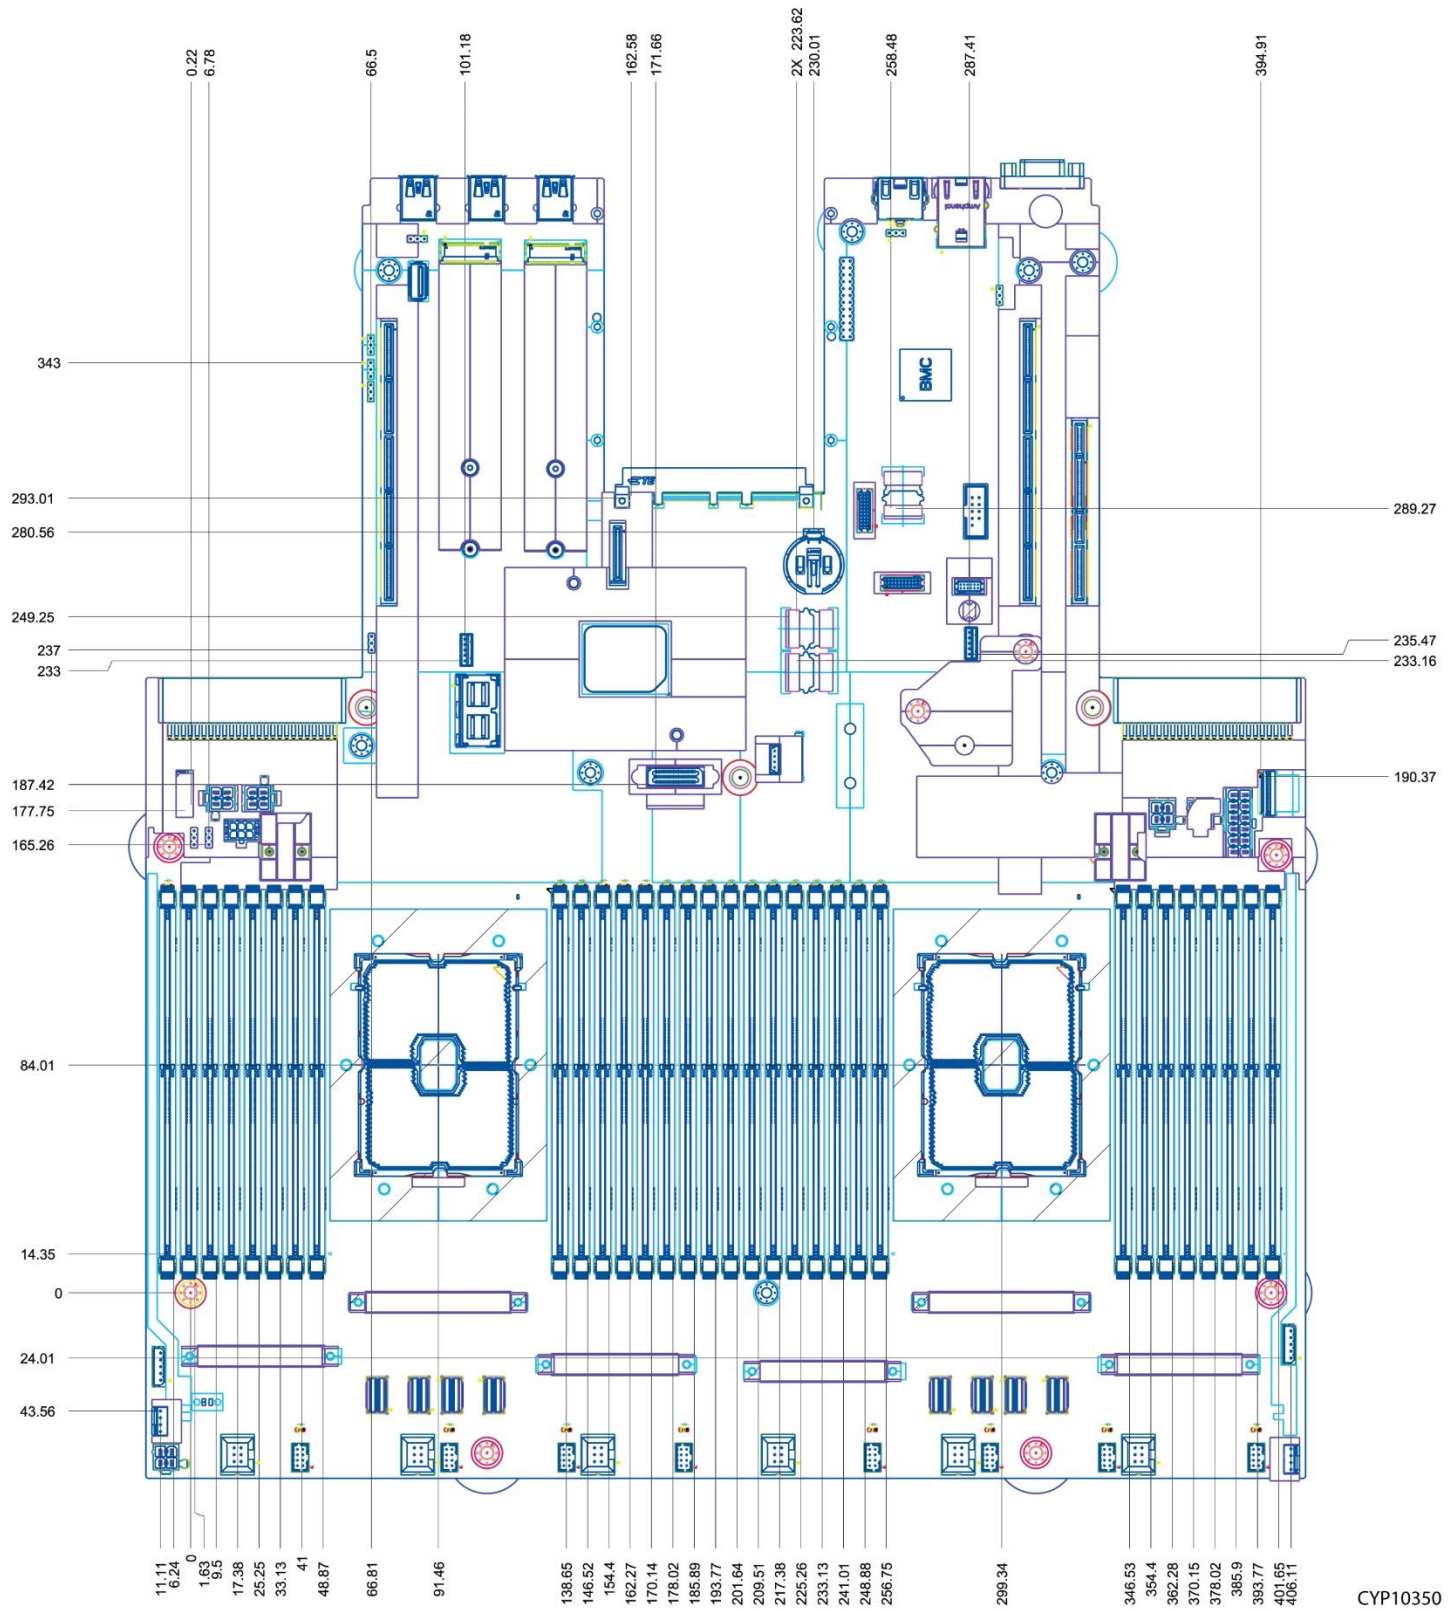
Intel® Server Board M50CYP2SB Family Bottom Surface Keep Out Zone (drawing 2)
